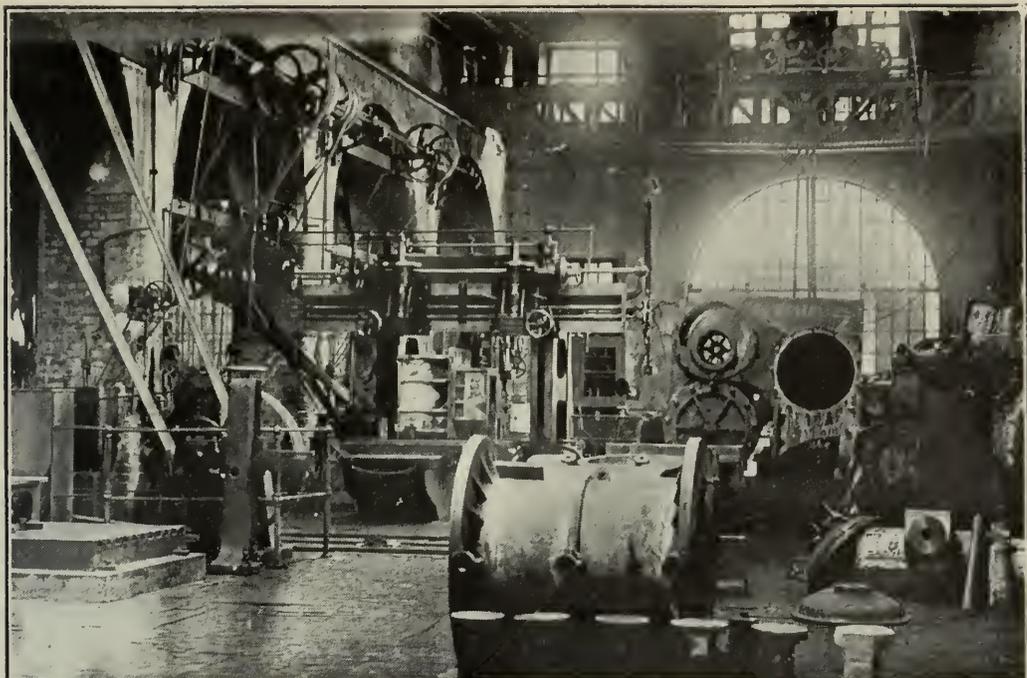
MILLING MACHINE FOR LARGE CYLINDERS.
